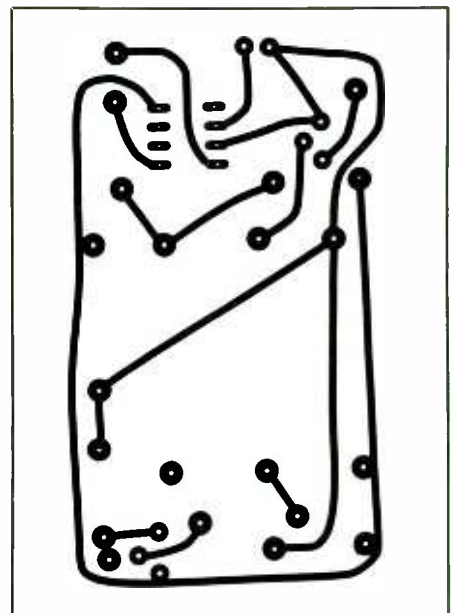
Actual-size etching-and-drilling guide for printed-circuit board for IR detection circuitry.
